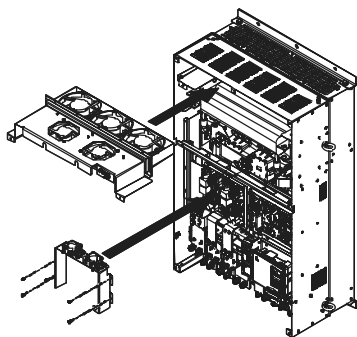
Installing the Cooling Fan Units: 4A0515 and 4A0675
